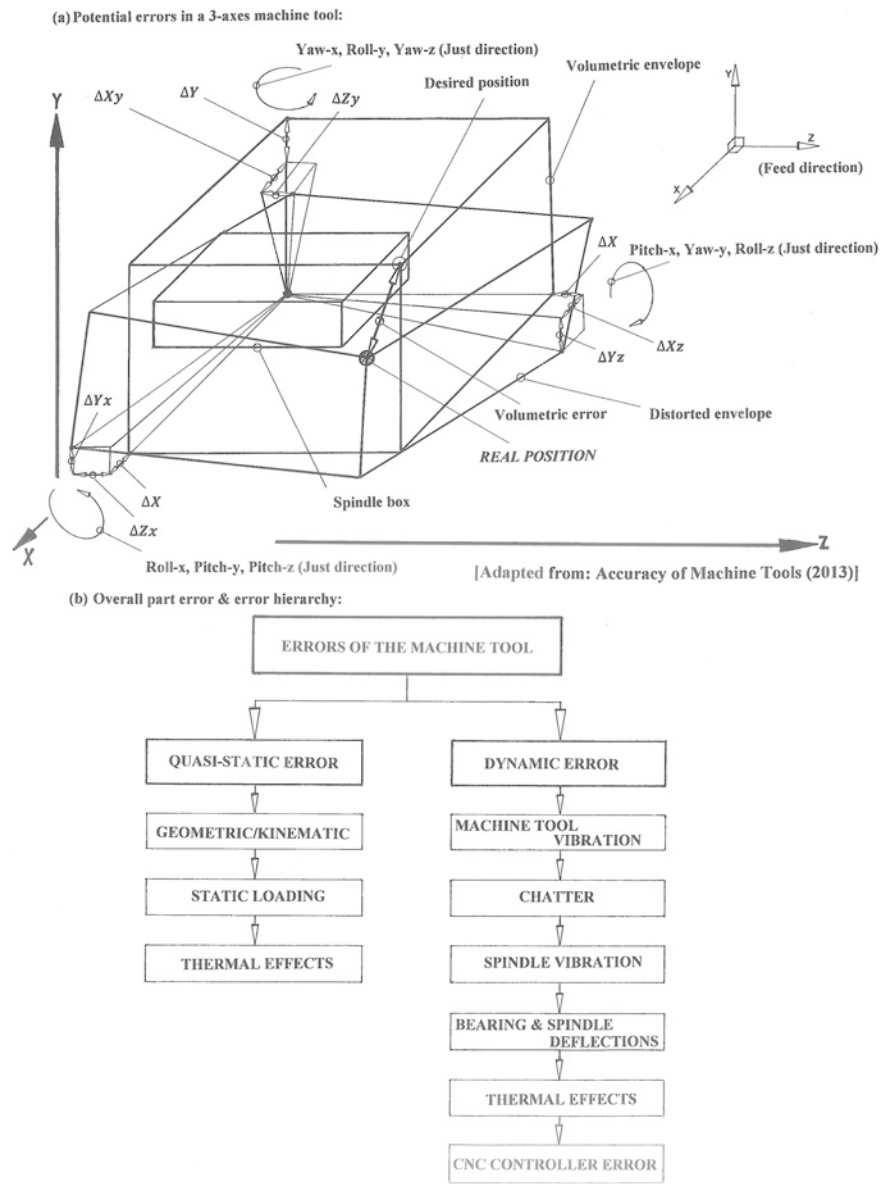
Typical errors causing machine and tool positioning inaccuracies
